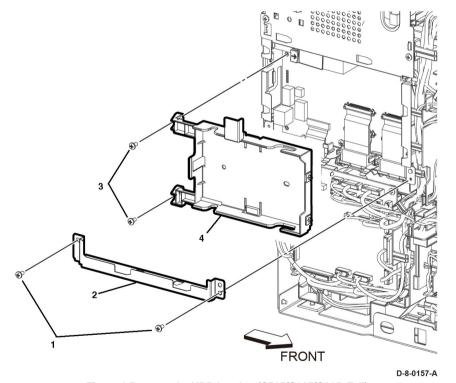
Remove the HDD bracket (C505/C605/C605_Tall)
